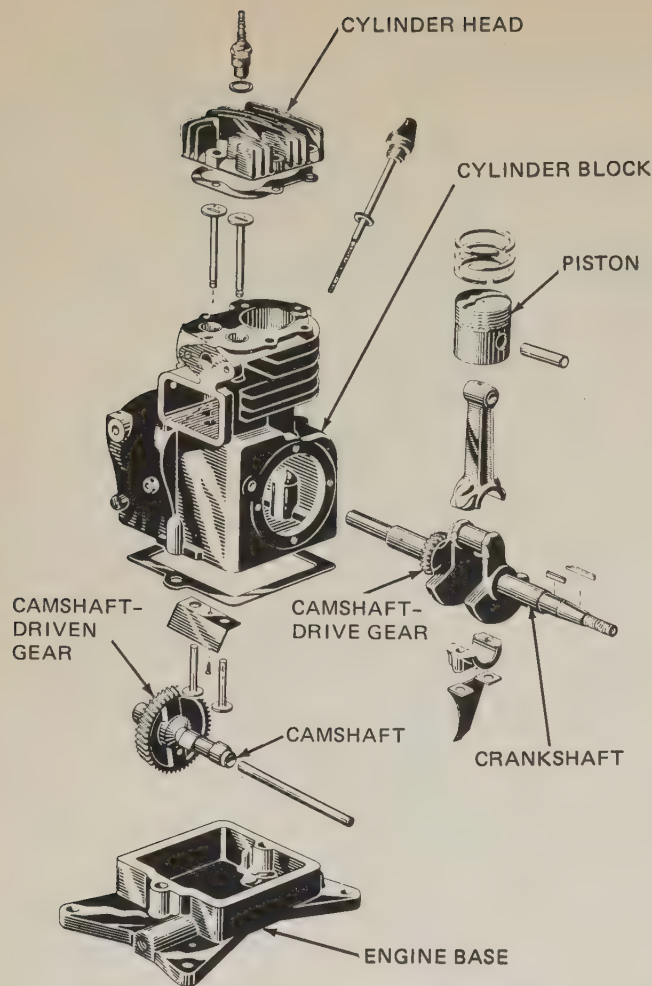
Disassembled view of a one-cylinder four-cycle engine. The head and cylinder block are separate parts. (Clinton Engines Corporation)
